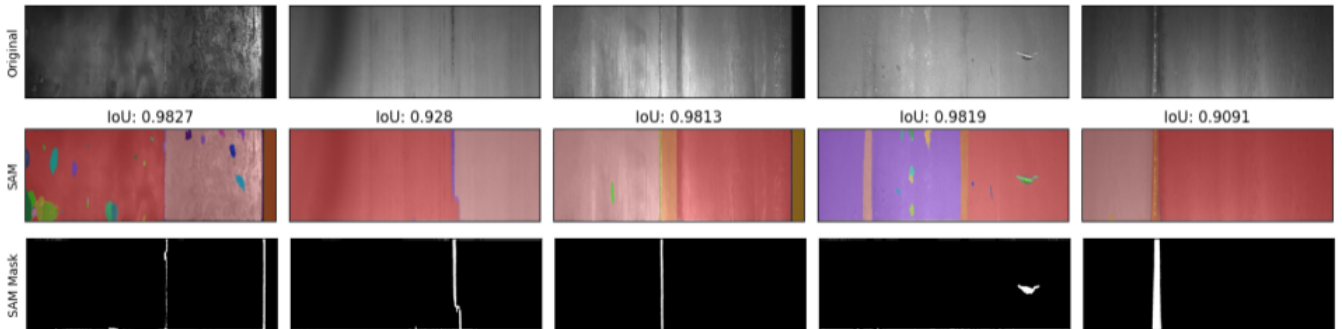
Crack steel segmentation outcomes utilizing SAM model.
